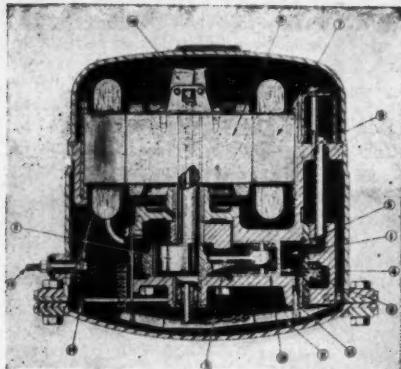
Cross sectional view of 1938 sealed compressing unit in which (1) is the compressor cylinder; (2) compressor eccentric; (3) connecting rod; (4) compressor piston; (5) suction valve; (6) discharge valve; (7) motor stator; (8) rotor; (9) suction intake; (10) unloader mechanism; (11) unloader valve arm; (12) unloader valve needle; (13) equalizer saddle; (14) discharge tube; (15) motor terminal.
